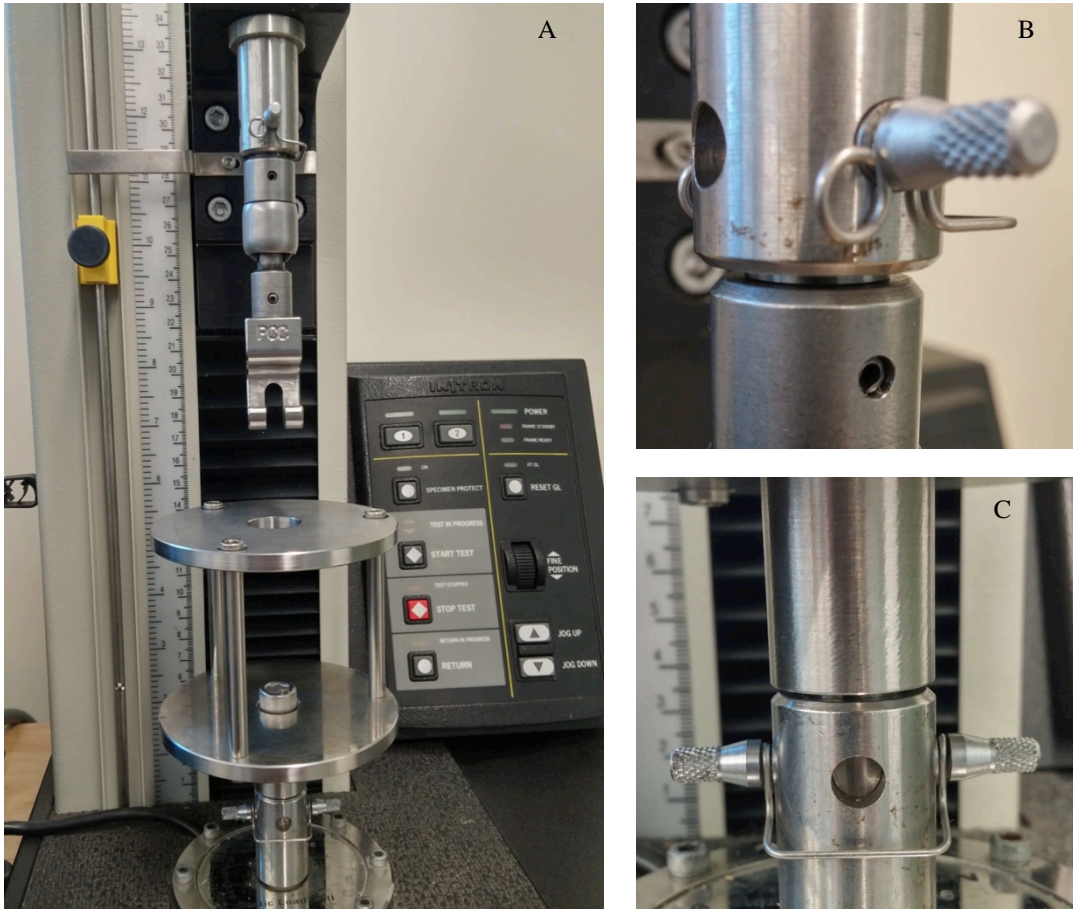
Final machined fixture in Mini 55 machine, displaying its vertical spacing (A), upper adapter pin fit (B), and lower adapter pin fit (C).
